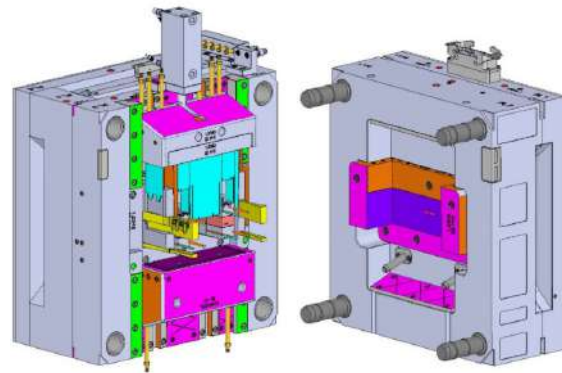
Plastic injection molding tool "DOOR 2x36DIN"
